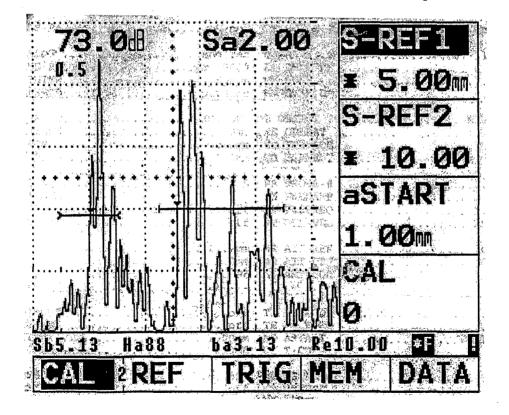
Ultrasonic echo pattern for MIG 21 Sintered brake pad
